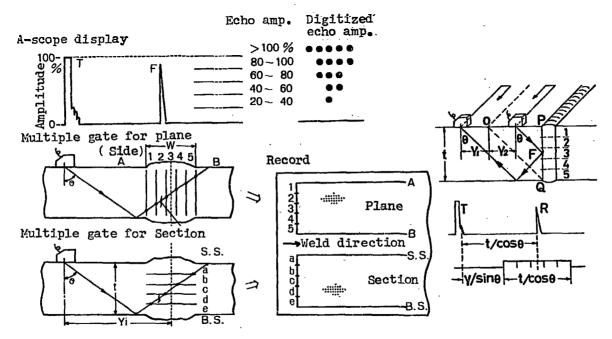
Principle of quasi 3-dimensional display system in case of single probe technique and tandem technique.
